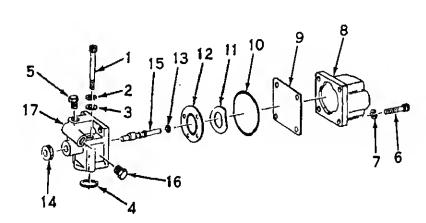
Fuel shut down valve, removal, disassembly, reassembly, and installation (sheet 1 of 2).
